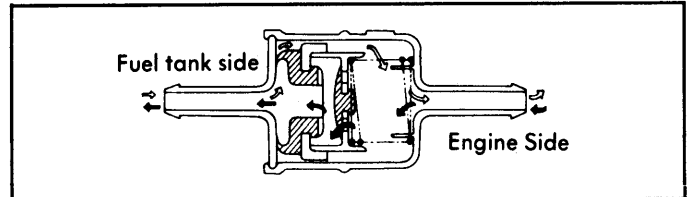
Check Valve (200SX, 210, 510, Pickup)
